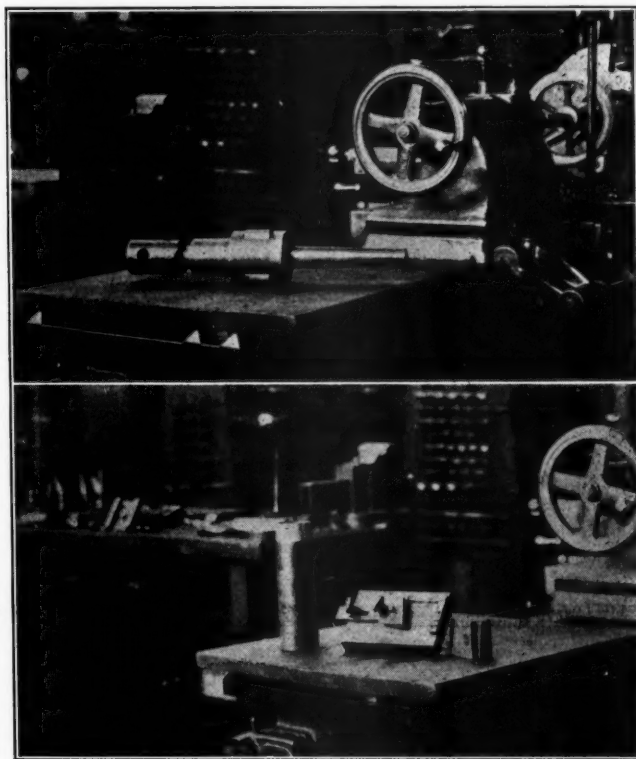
Top—A tube expander designed to reduce wear in the roller slots; Bottom—A jig used for uniformly grinding a set of safe-end scarfing cutters
